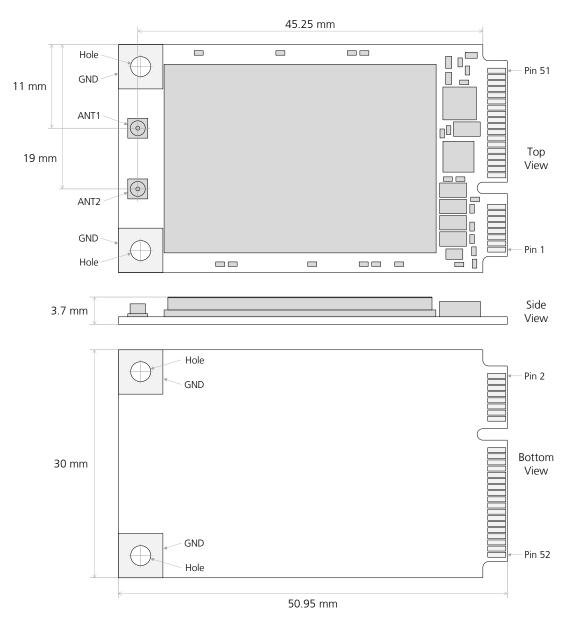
MPCI-L2 series mechanical dimensions (top view, side view, bottom view)
